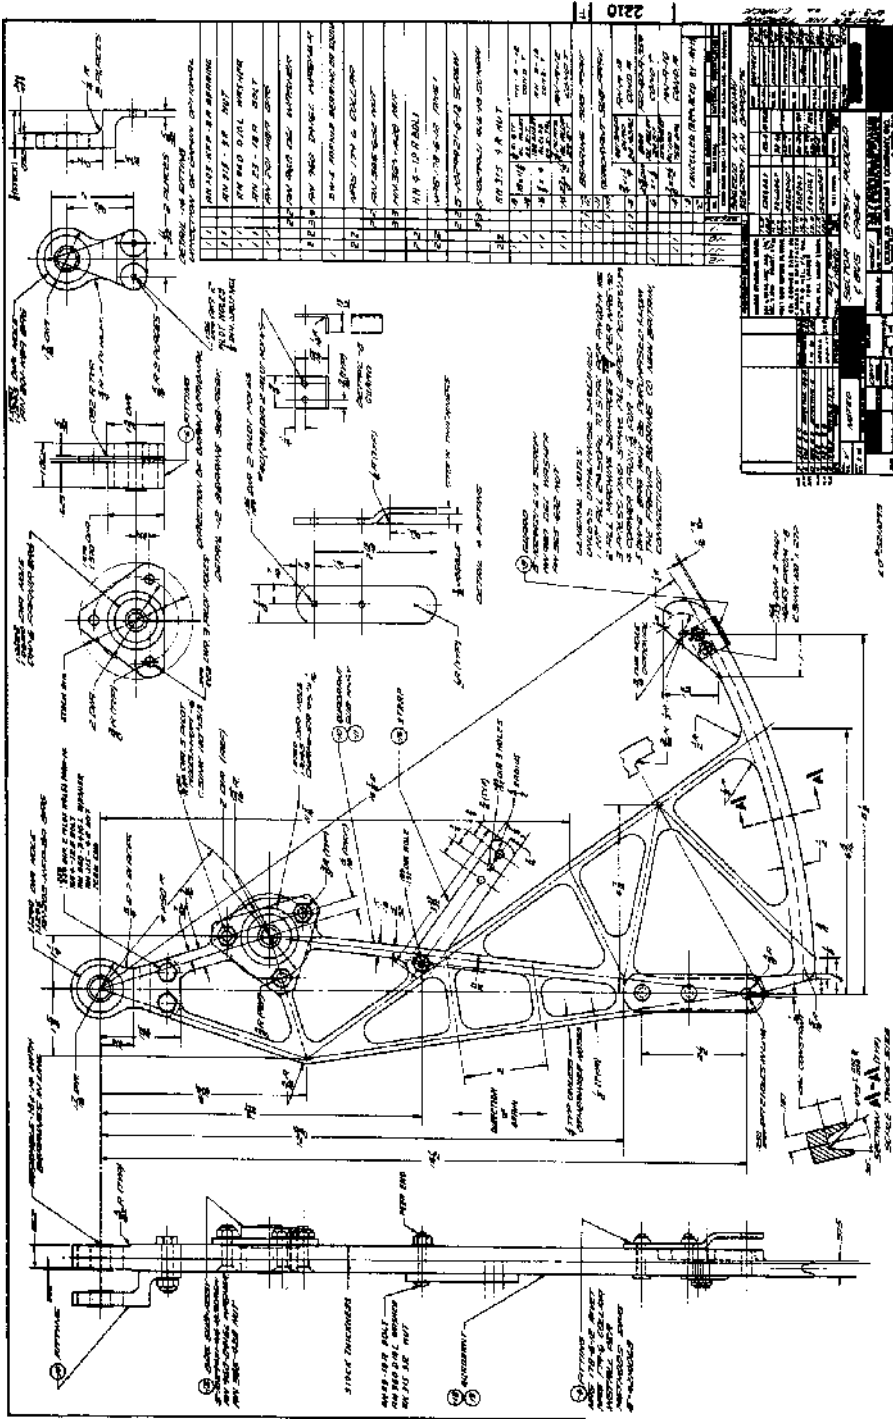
Communication: an example of a classic engineering design detail drawing
